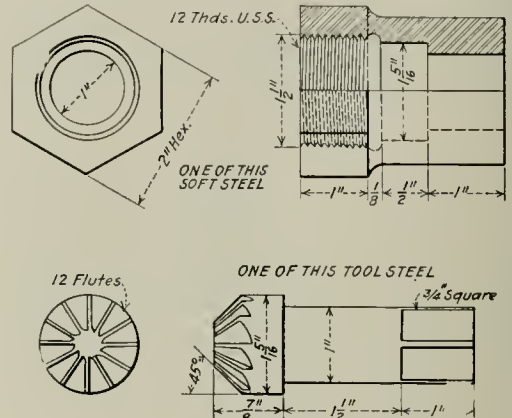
Reseating Tool for Lubricator Throttle Valve
